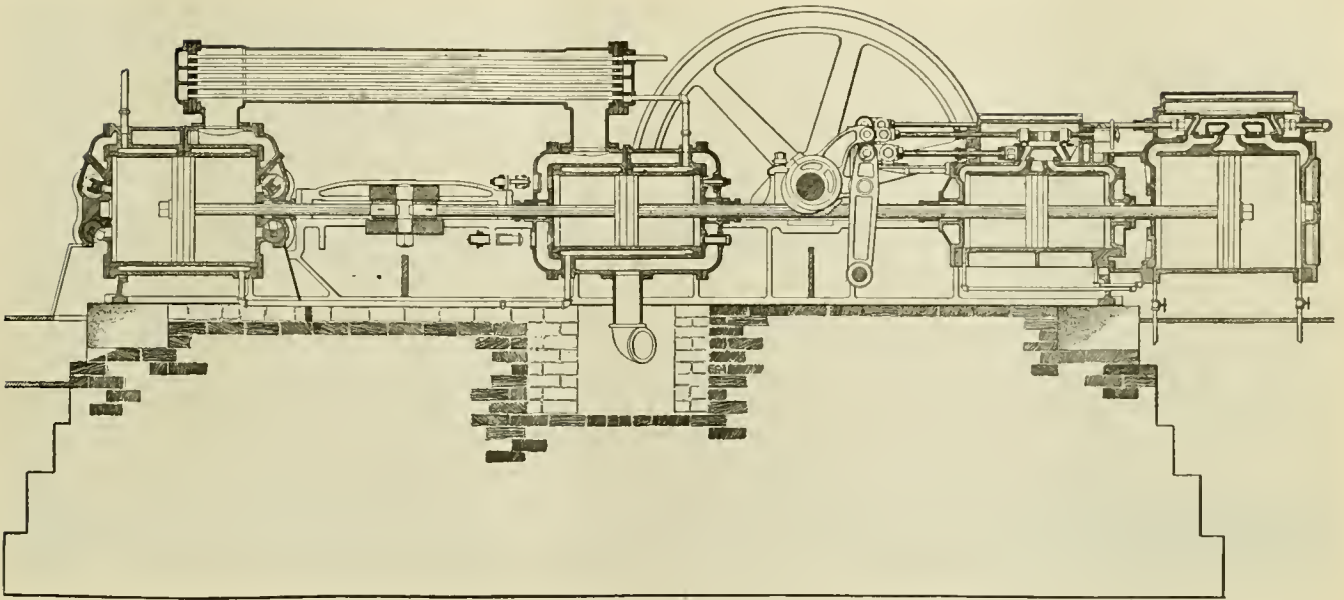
Sectional View of Norwalk Compound Air Compressor Driven by a Compound Steam Engine.
